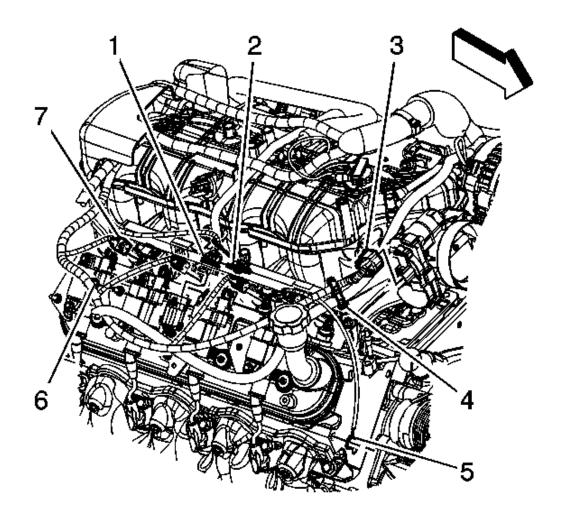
View Of CPA Retainer, Electrical Connectors & Engine Harness Clips Courtesy of GENERAL MOTORS CORP.
